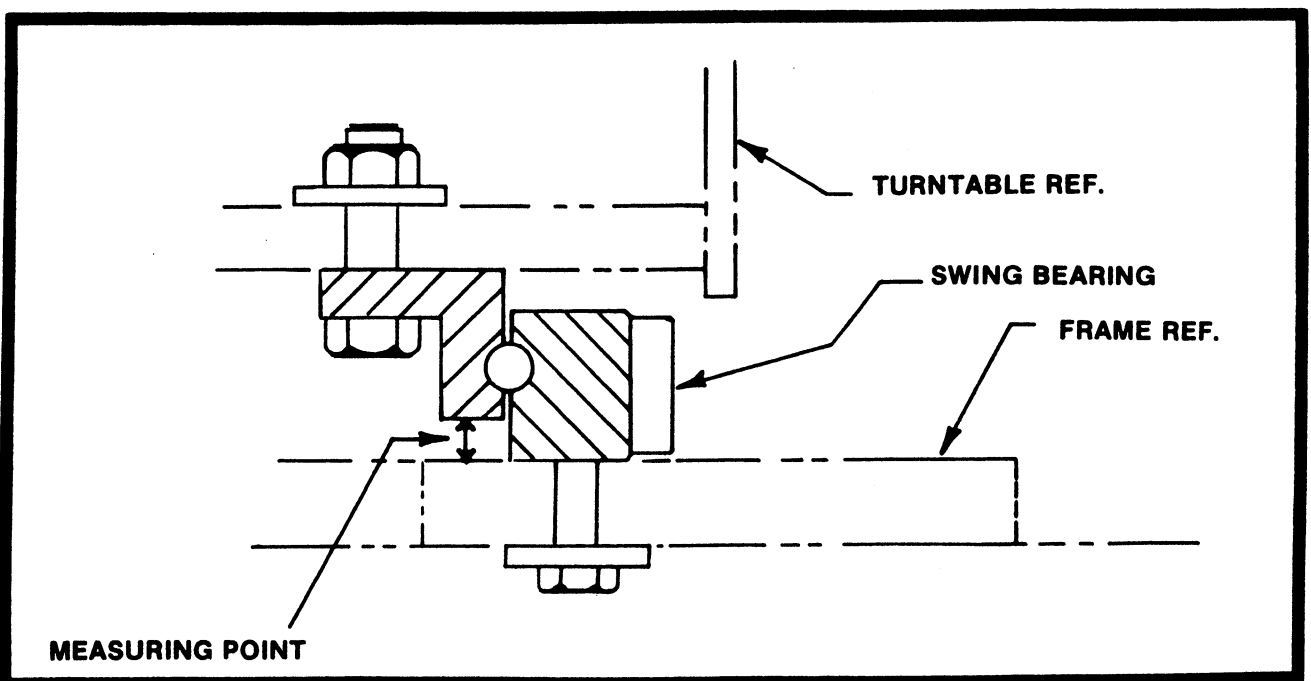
Swing Bearing Tolerance Measuring Point.
